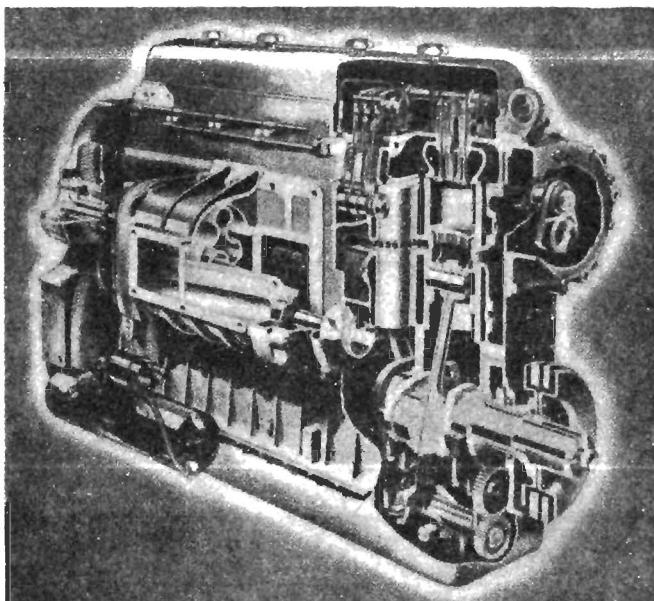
Partial cutaway view of a typical six cylinder, two-stroke cycle CI engine (courtesy of Detroit Diesel Engine Division, General Motors Corporation).
